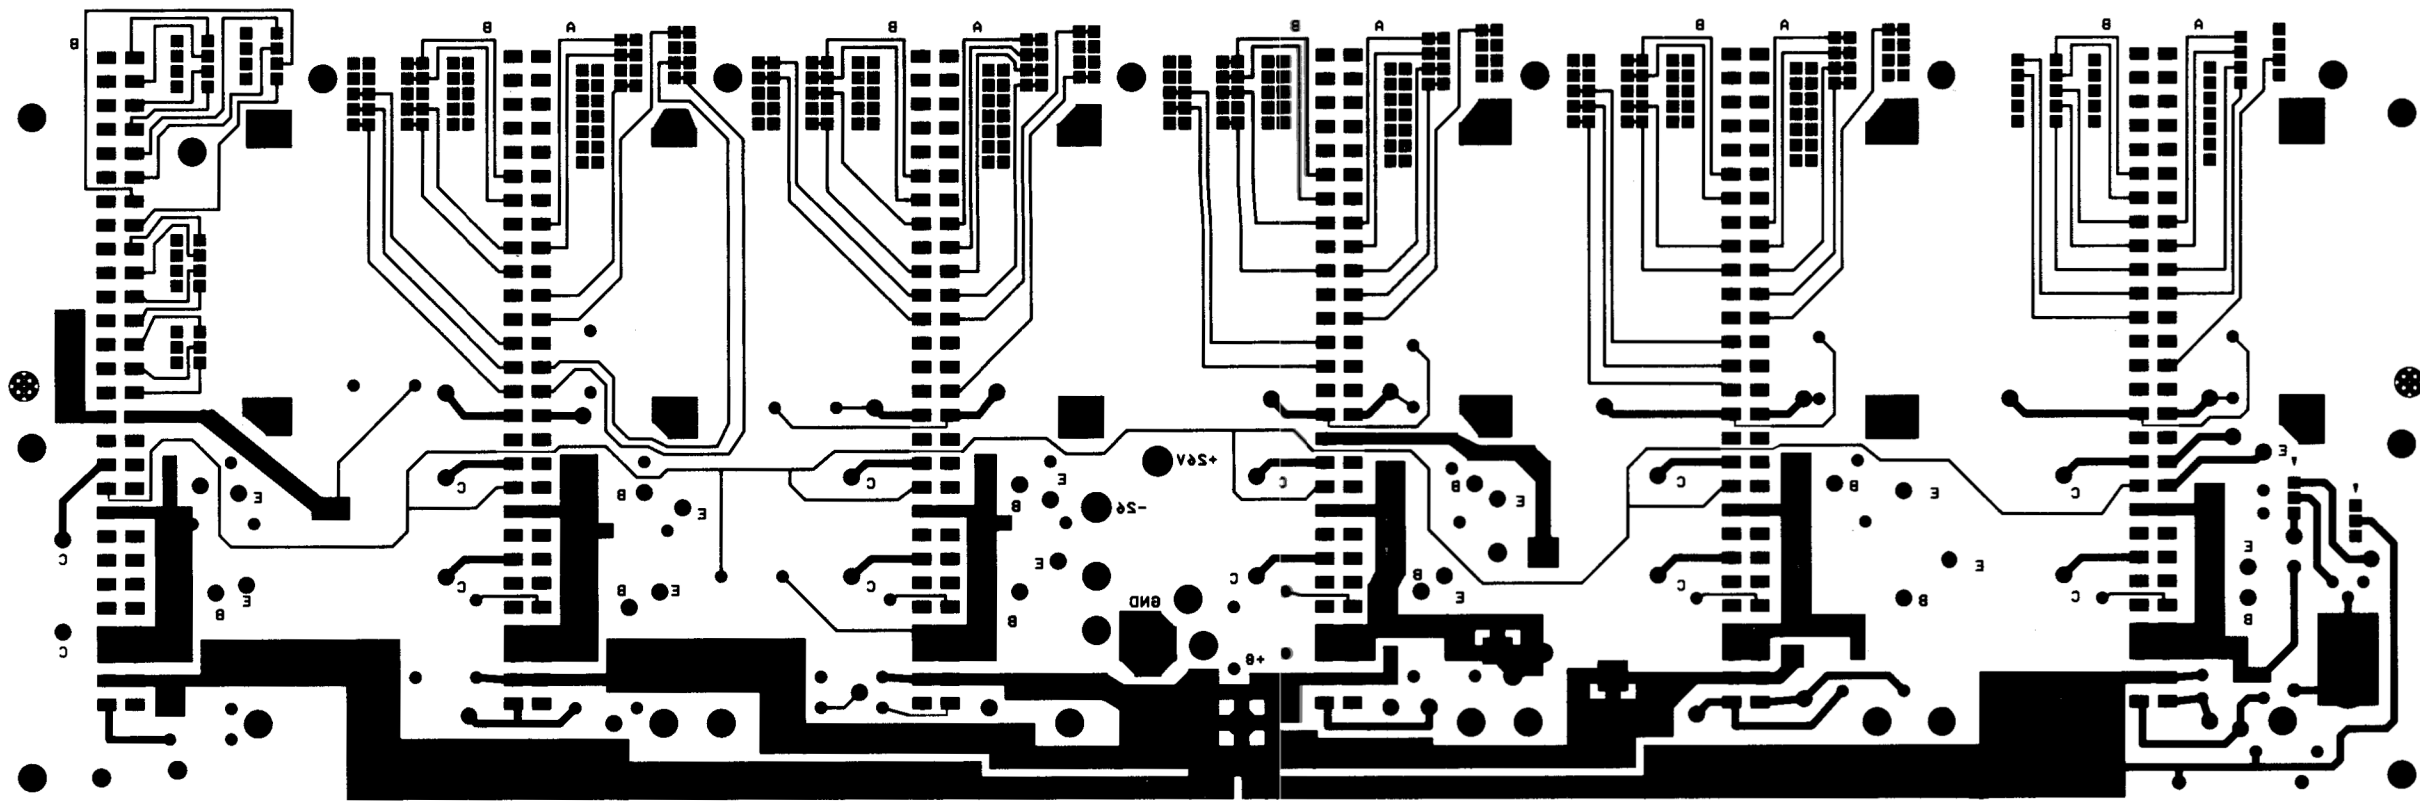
Main Interface Board (rear view of frontside, Assy A10).
